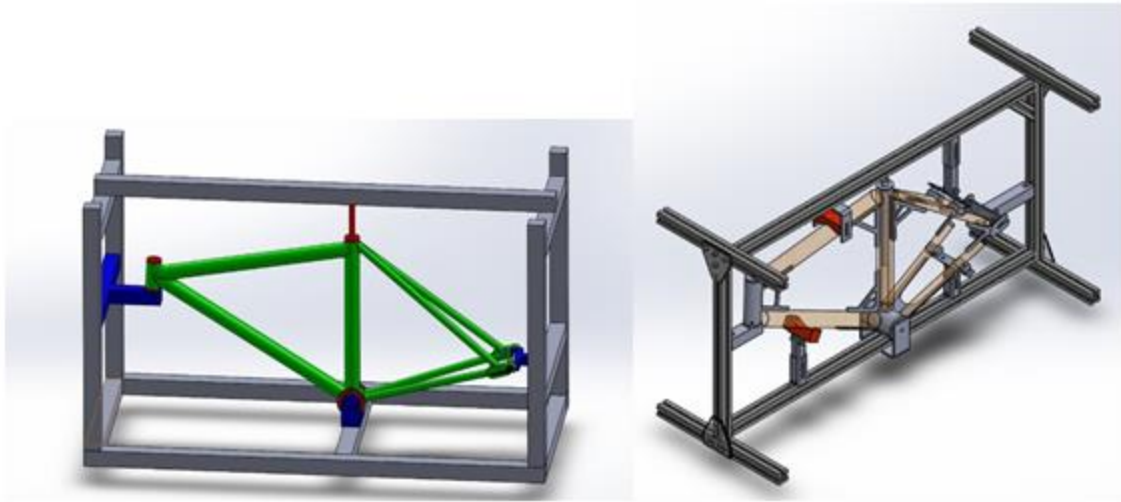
a) Box-style Jig b) Planar exo-frame Jig
